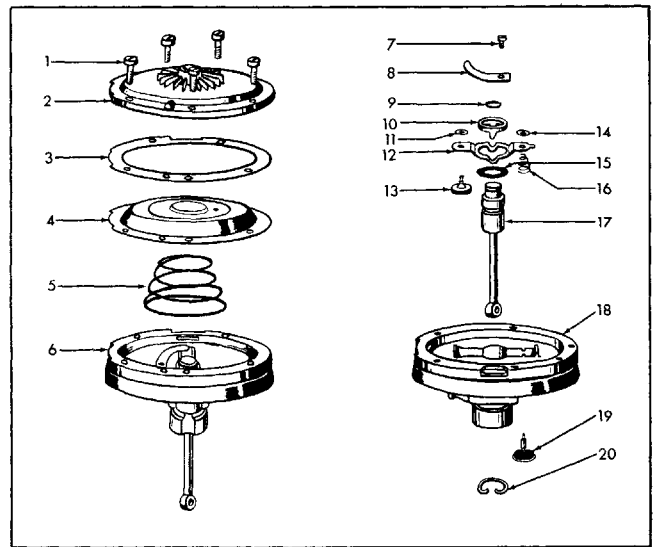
Removal of Front Piston Plate, Diaphragm, Push Rod and Plunger, and Poppets
